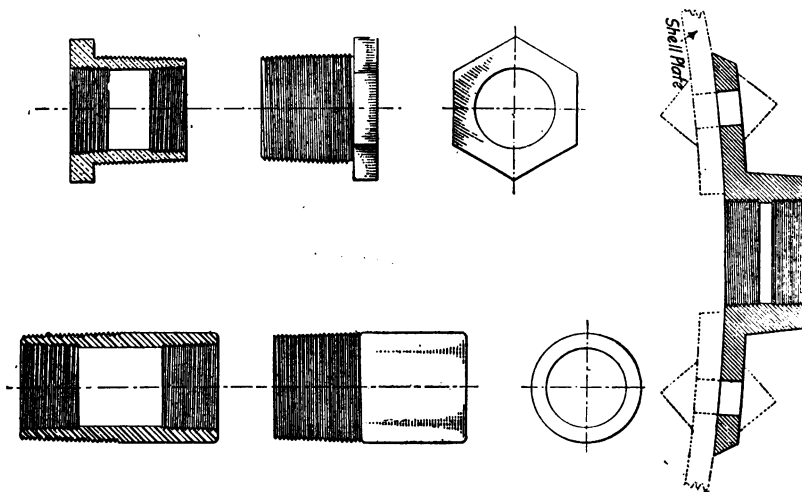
TYPICAL BOILER BUSHINGS AND FLANGE
